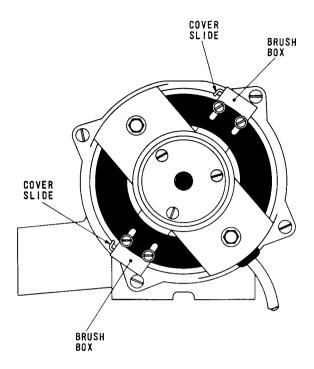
GOVERNED MOTOR — LEFT-HAND END
